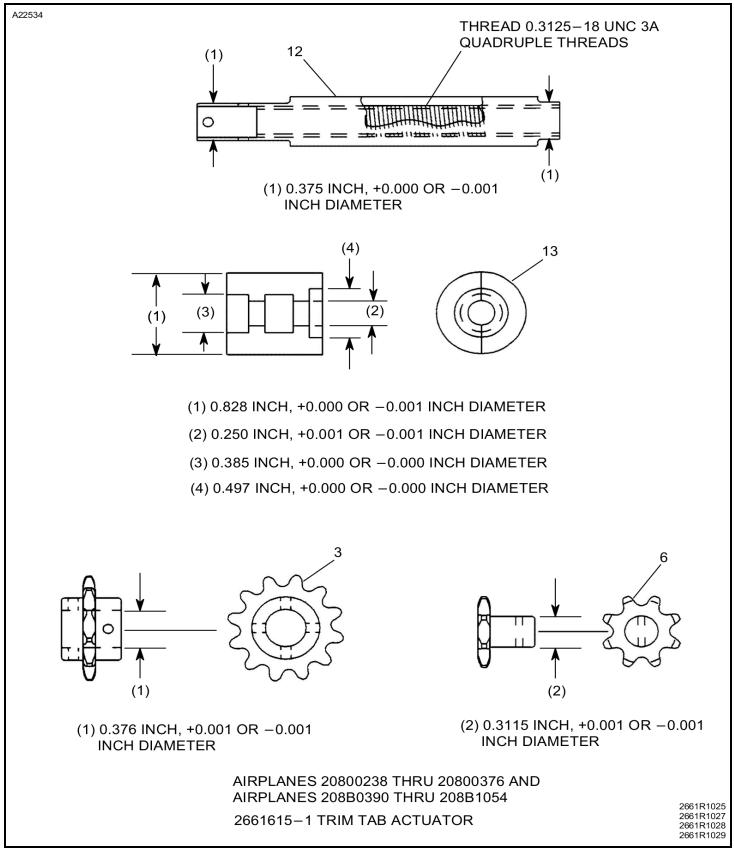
Sheet 6 : Aileron Trim Tab Actuator Disassembly/Assembly
